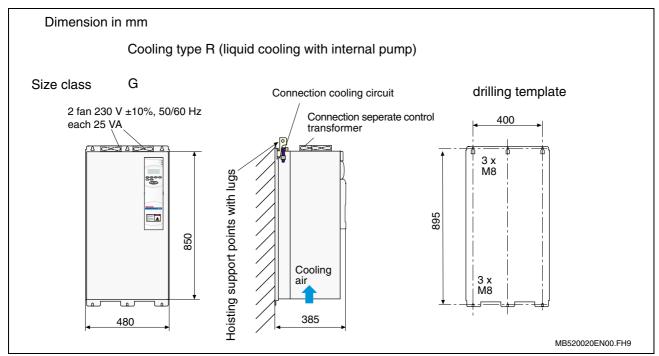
Dimension sheet of inverter, size classes G with cooling type R
